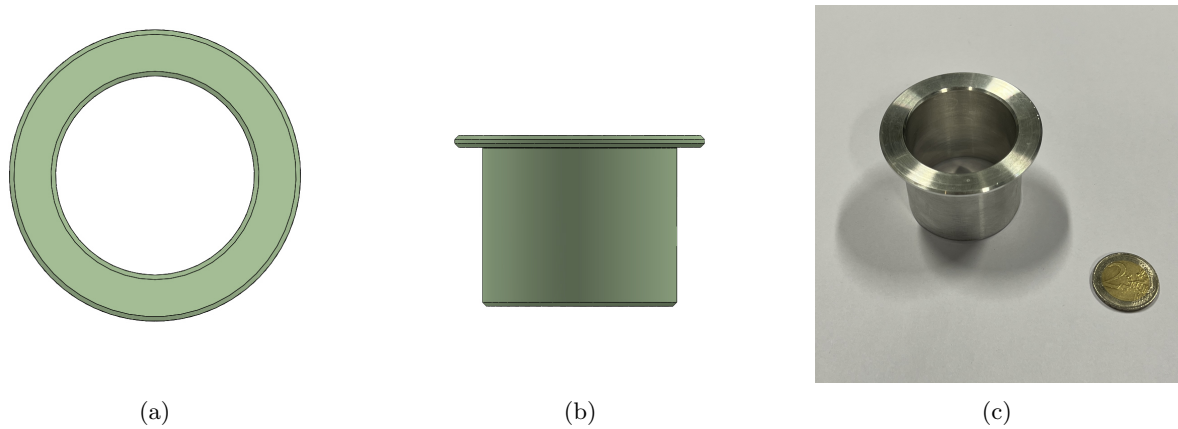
Different views of the squirrel cage: (a) top view (b) side view (c) real view.
